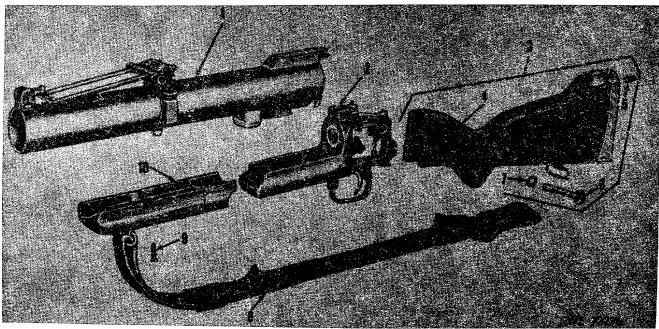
40-mm grenade launcher M79--partial disassembly.
